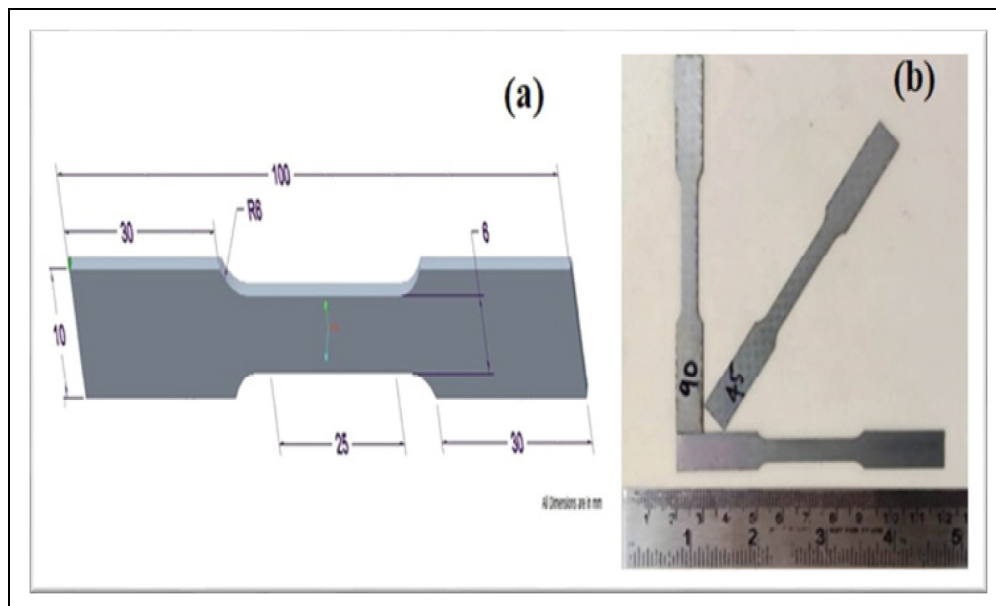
(a) ASTM E08 standard sample specimen, (b) tested tensile test specimens.
